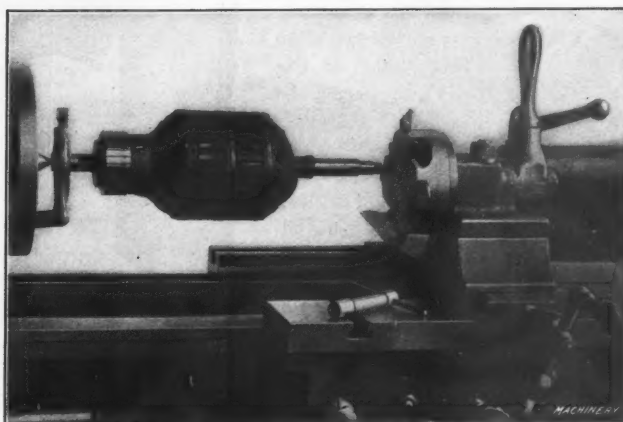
Stevens Turret Toolpost in Operation on the Lathe
